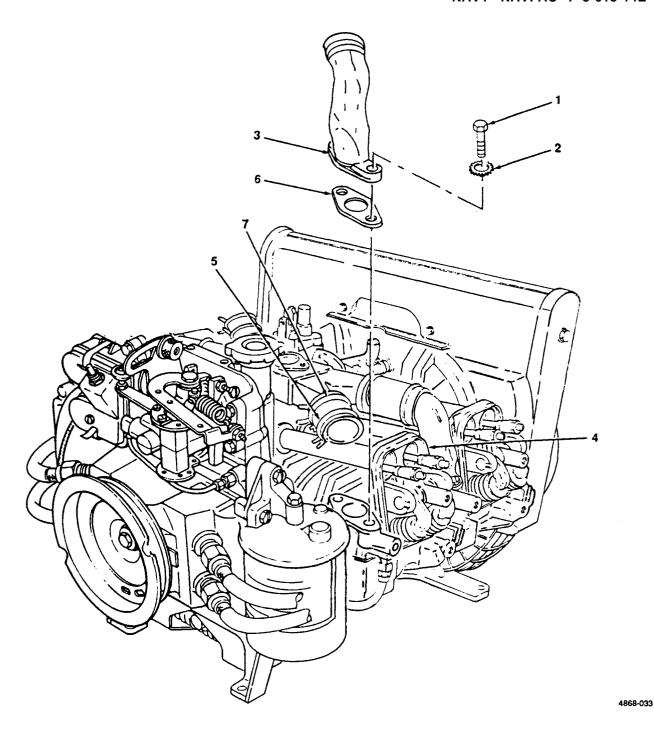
Intake Manifold Adapters, Removal and Installation.
